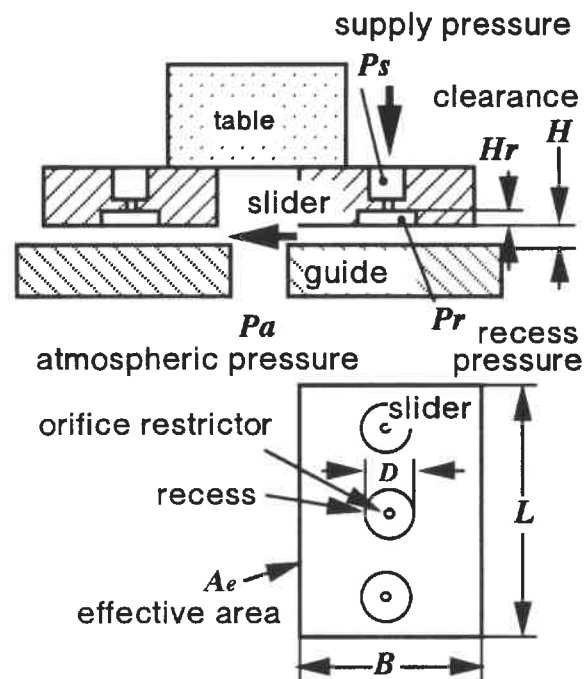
Cross section of an air-lubricated slideway for ultra precision machine tools
